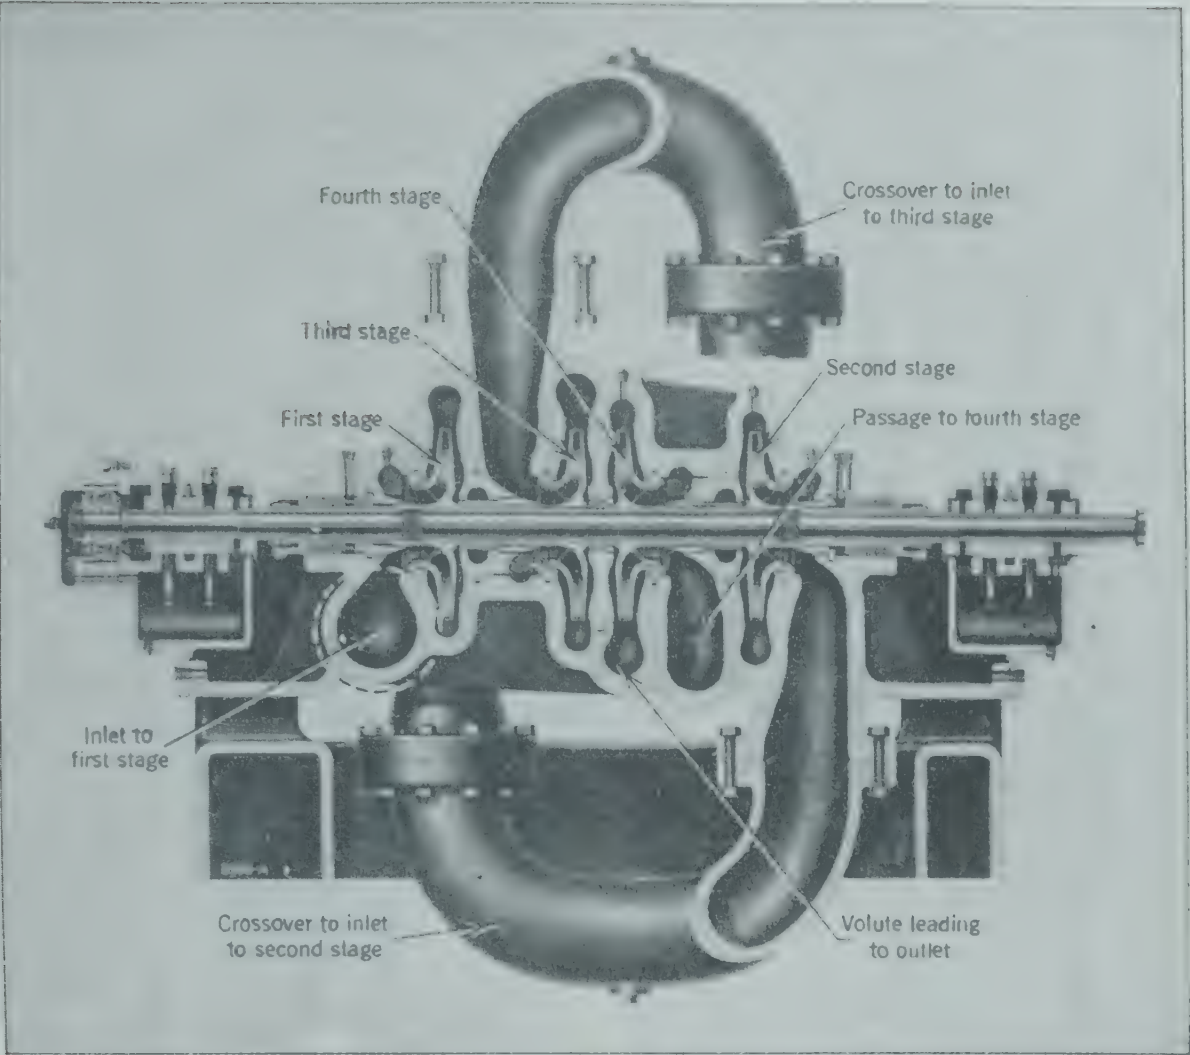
Cutaway view of four-stage centrifugal pump. (De Laval Steam Turbine Co.)
